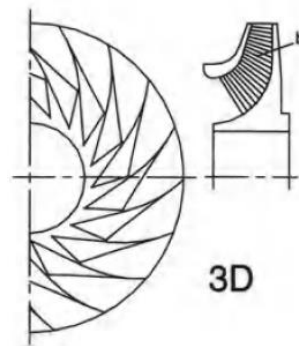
3D-impeller, shrouded with twisted backward-curved blades, b straight-line blade elements for 5-axis NC flank milling [18].
